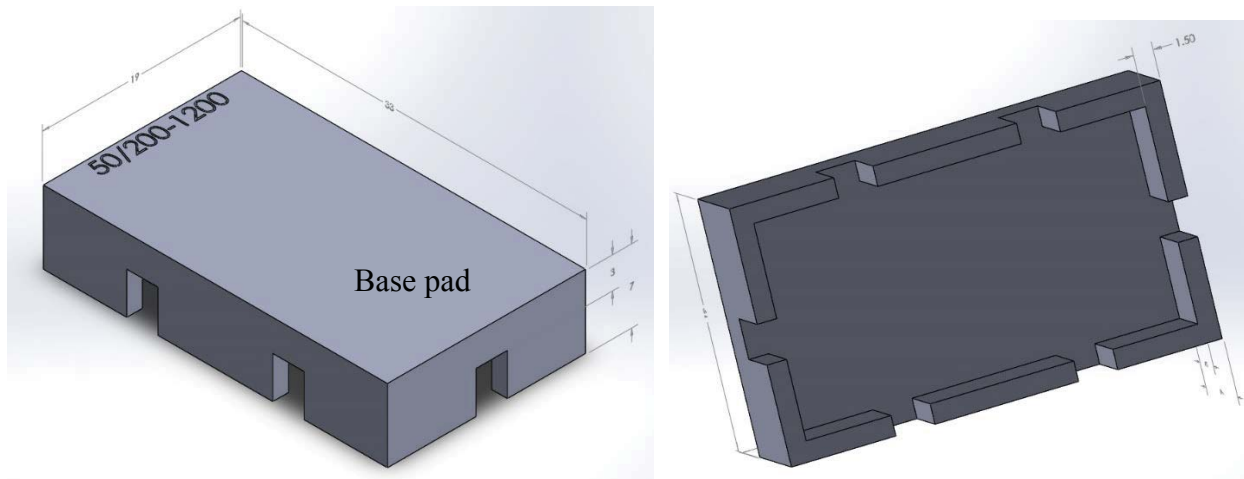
(a) Top surface of the pad with a solid support (b) Bottom surface of the pad showing solid support of thickness 1.5 mm.
